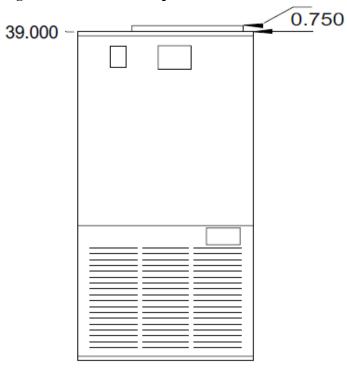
Air Handler Supply Duct Mounting Flange Dimensions
